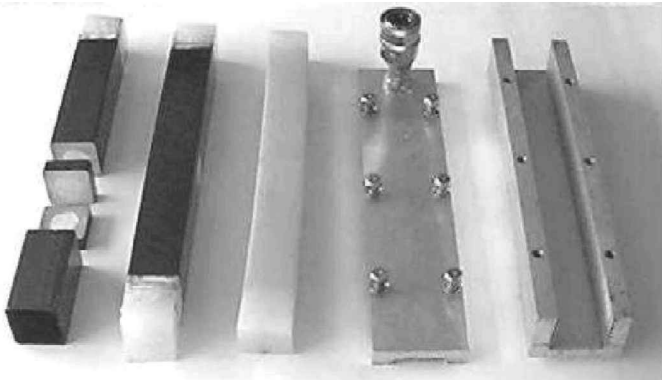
Metal tools, silicon rubber rod, a tube after cure, and sliced tubes (from right).
